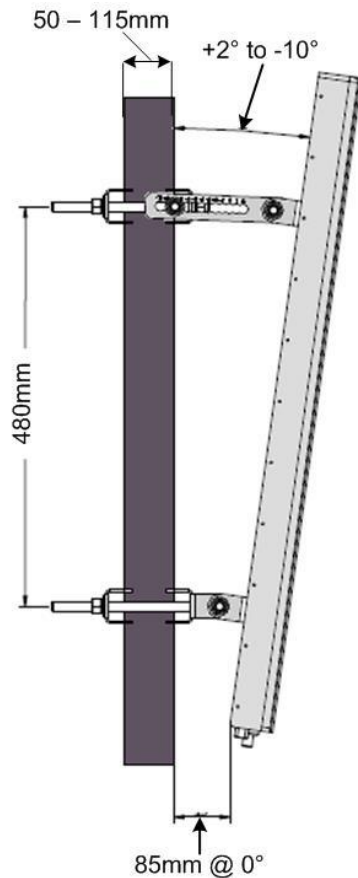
Adjustable Mounting Kit 2, with 'V' Blocks
